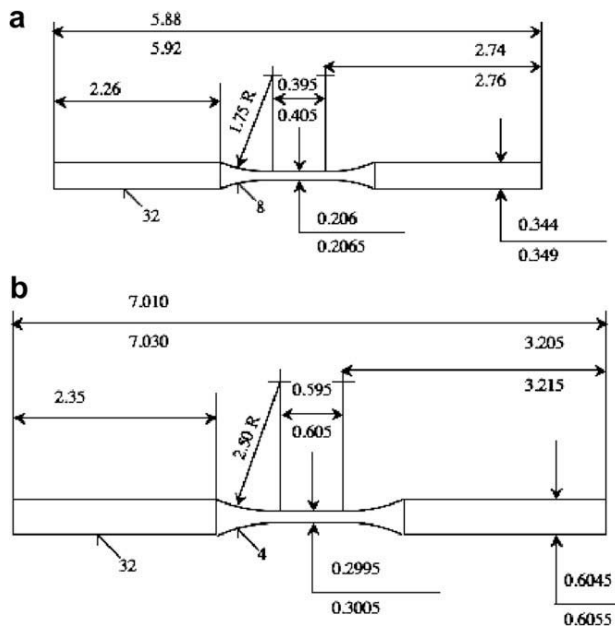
Test specimen geometries. The dimensions shown in inches.
